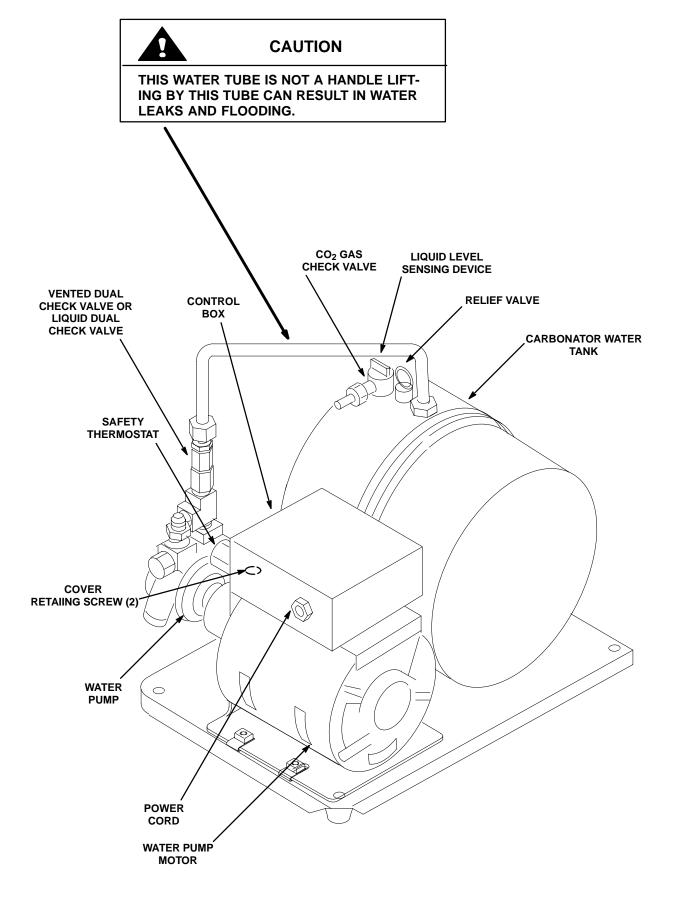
CARBONATOR ASSEMBLY COMPONENTS
